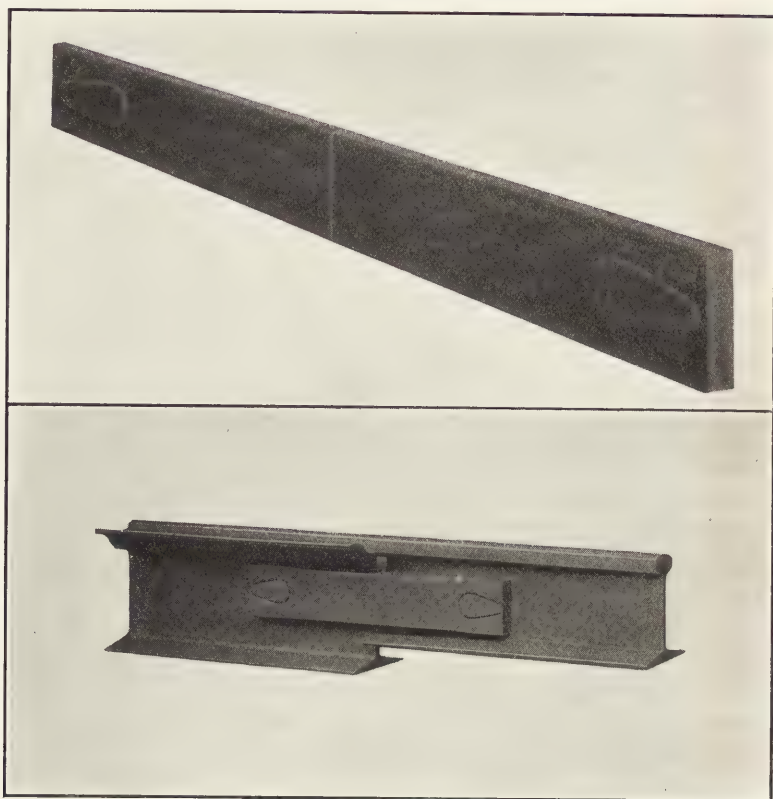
Joint or Connecting Plate and Finished Weld Showing Rails of Different Section Joined.
